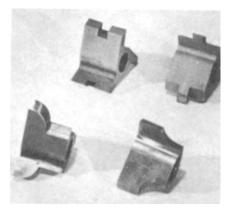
Examples of cutters that should be purchased in sets. At the top, tongue-and-groove cutters. The others are mating cutters for the drop leaf table joint.
